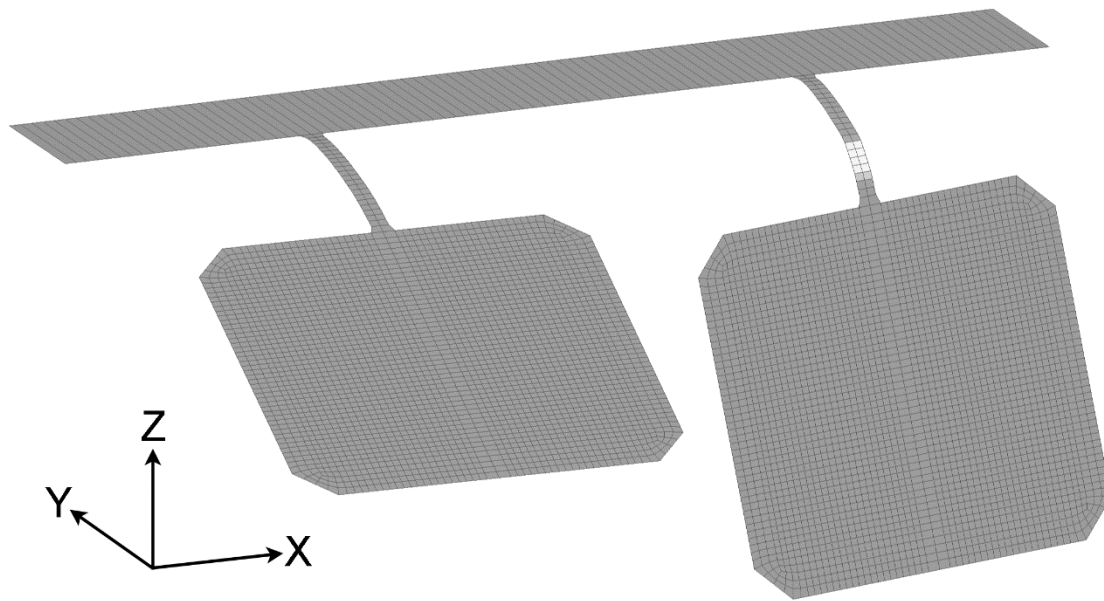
Observed ‘sagging’ of the work-piece while not in contact with tooling.
